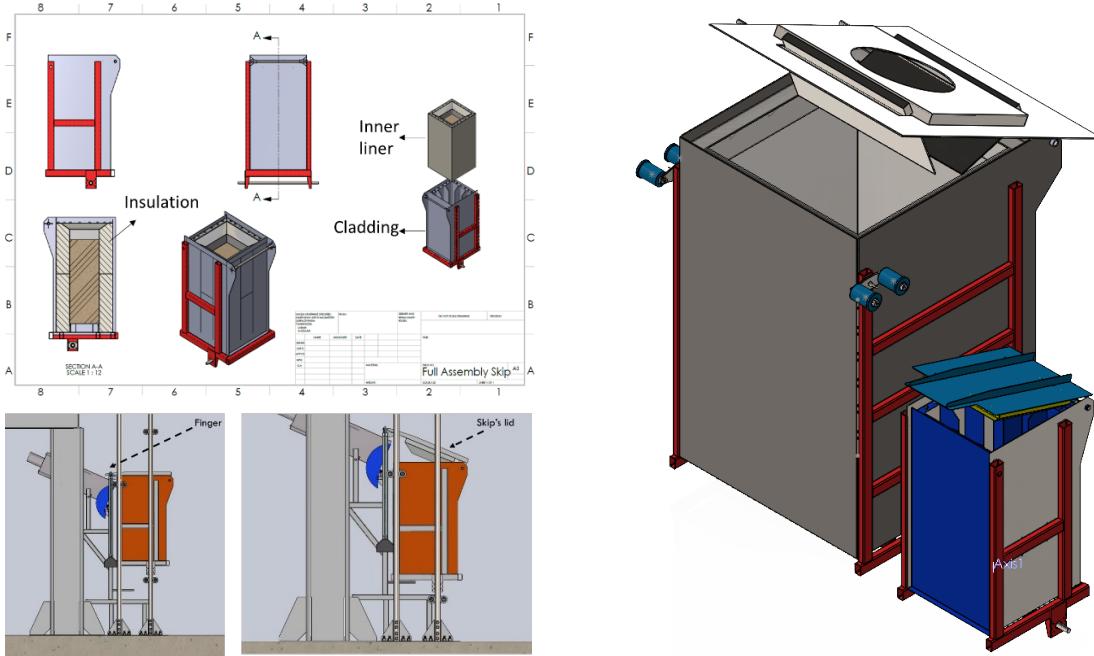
Pre-skip final design, (left) KSU design, (right) SNL design
